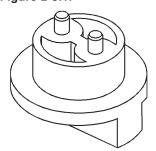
Model VT-1 Wet Valve Tool.
